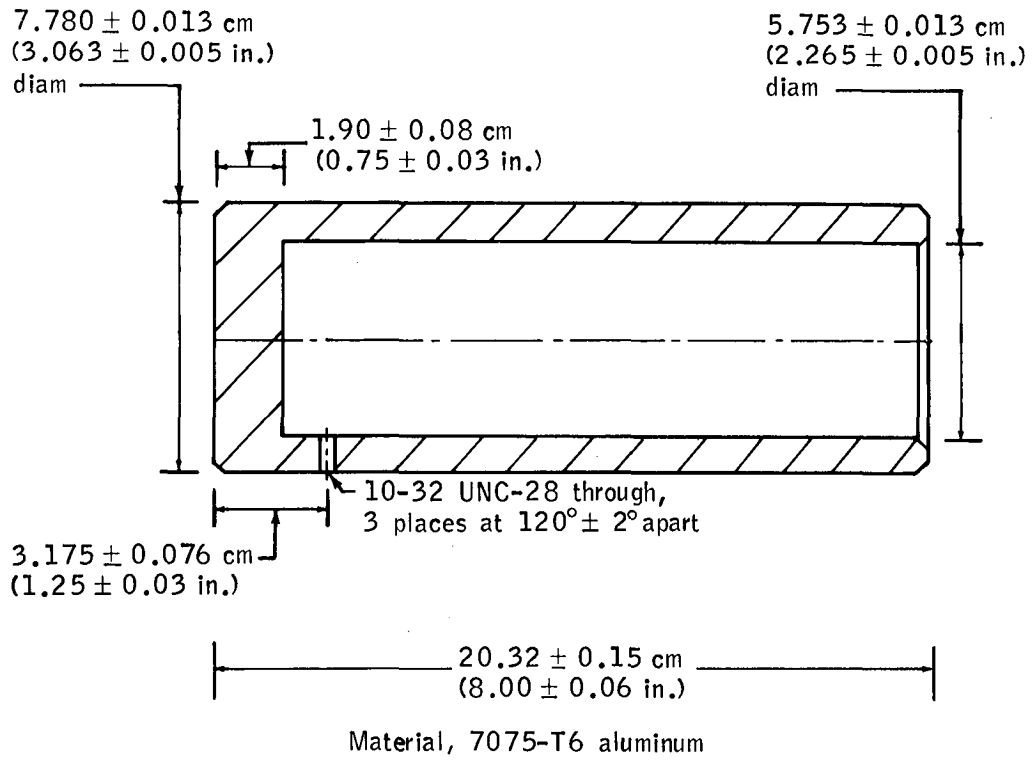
Sabot used to adapt penetrator to 7.6-centimeter (3 inch) air gun.
